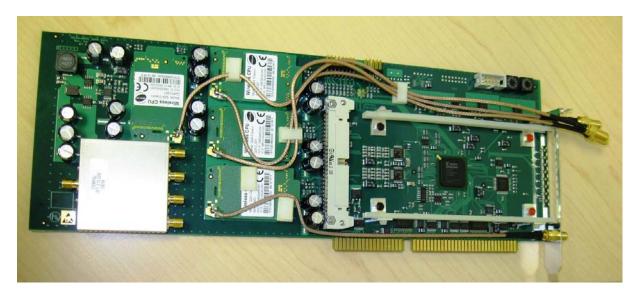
GSM Card, PCB (top view, without SIM card holder)
